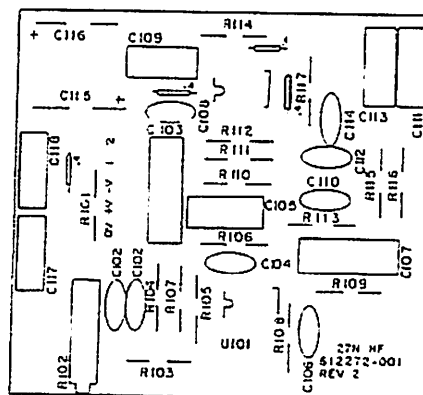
Typical Circuit Board Layout - Harmonic Filter Module
